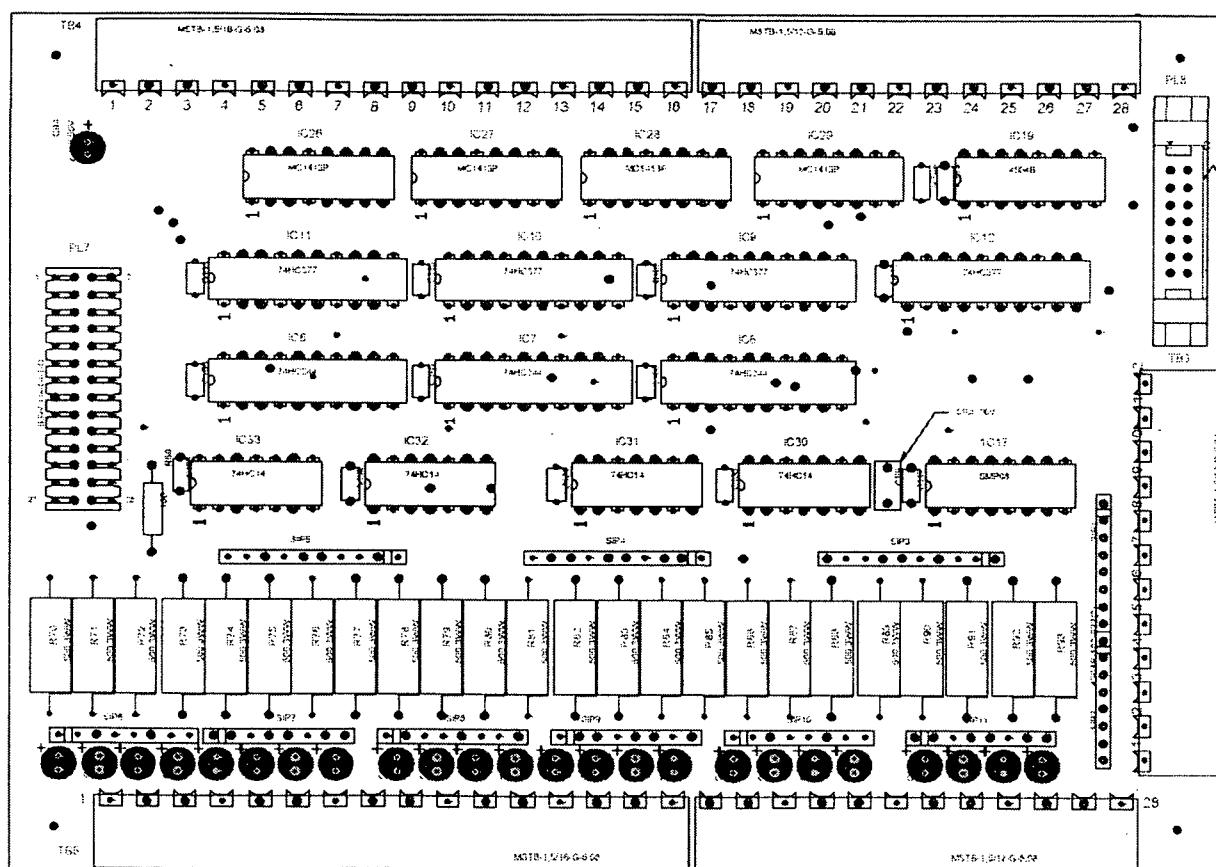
I/O Expansion Board (Printed Circuit Layout)
